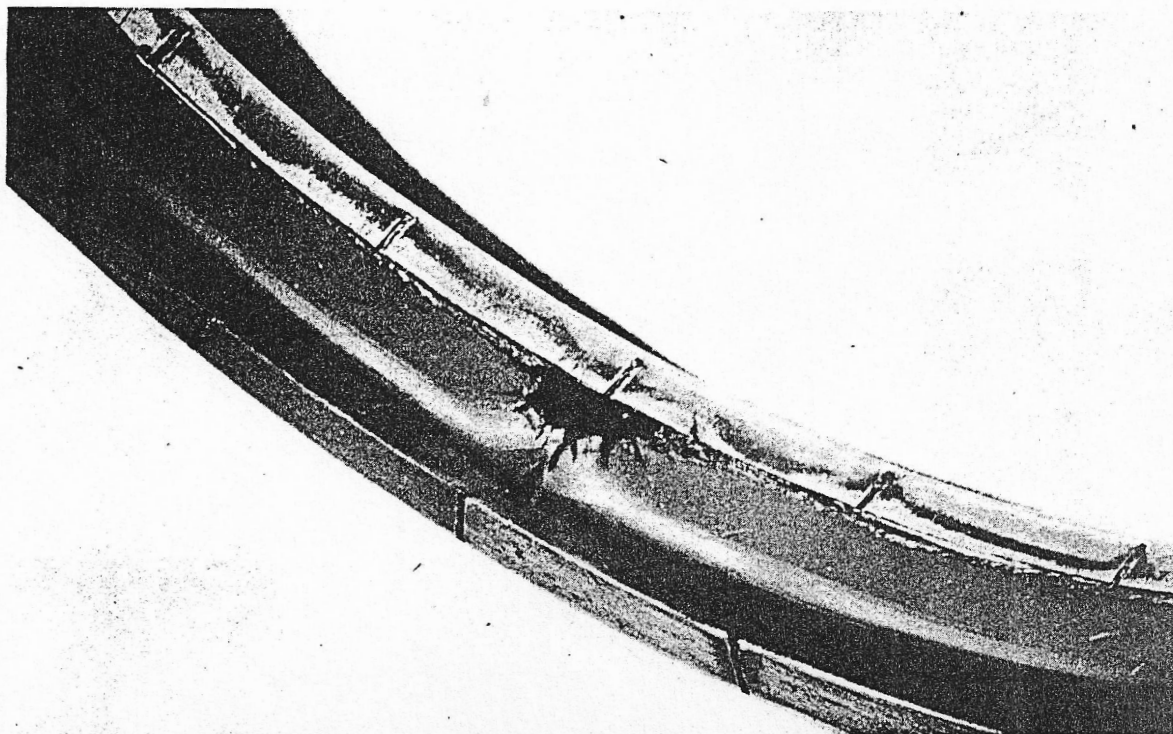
FAILURE OF CENTRE BEARING THRUST RING
